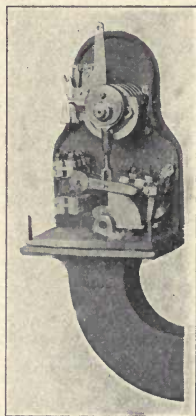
BACK VIEW OF PUSHER ATTACHMENT SHOWING MECHANISM
